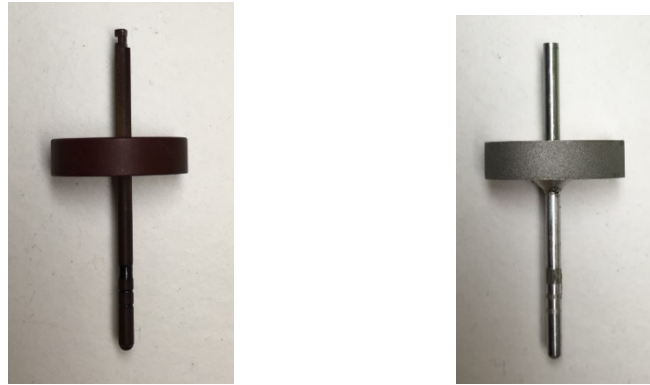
Decentering jig in the early development, polymeric jig (left) and aluminium jig (right)
